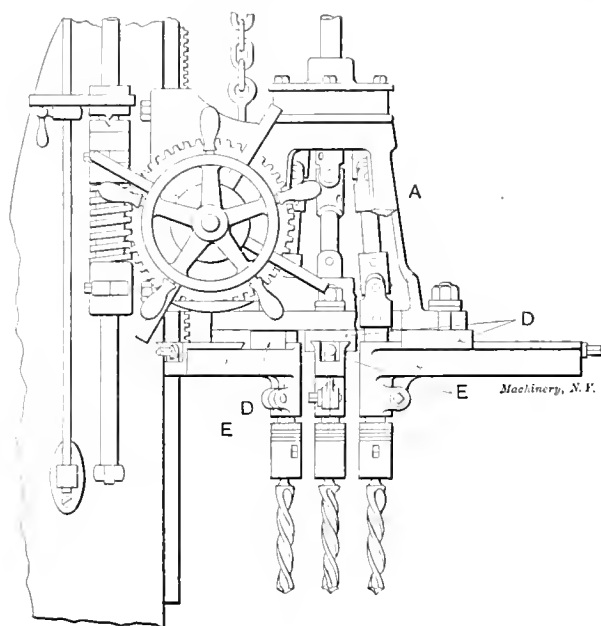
Multiple-spindle Drill provided with Improved Facilities for Adjusting the Drill Spindles.
